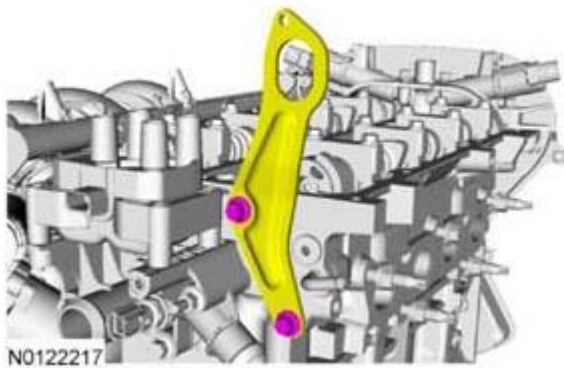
Identifying LH Engine Lift Eye And Bolts
